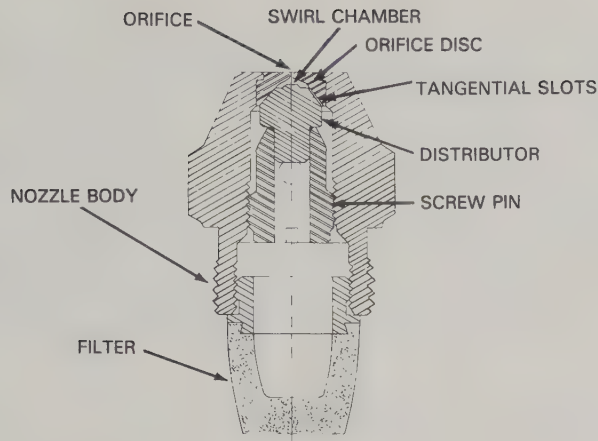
Cross-sectional view of a nozzle used in a gun-type oil burner. (Delavan)
